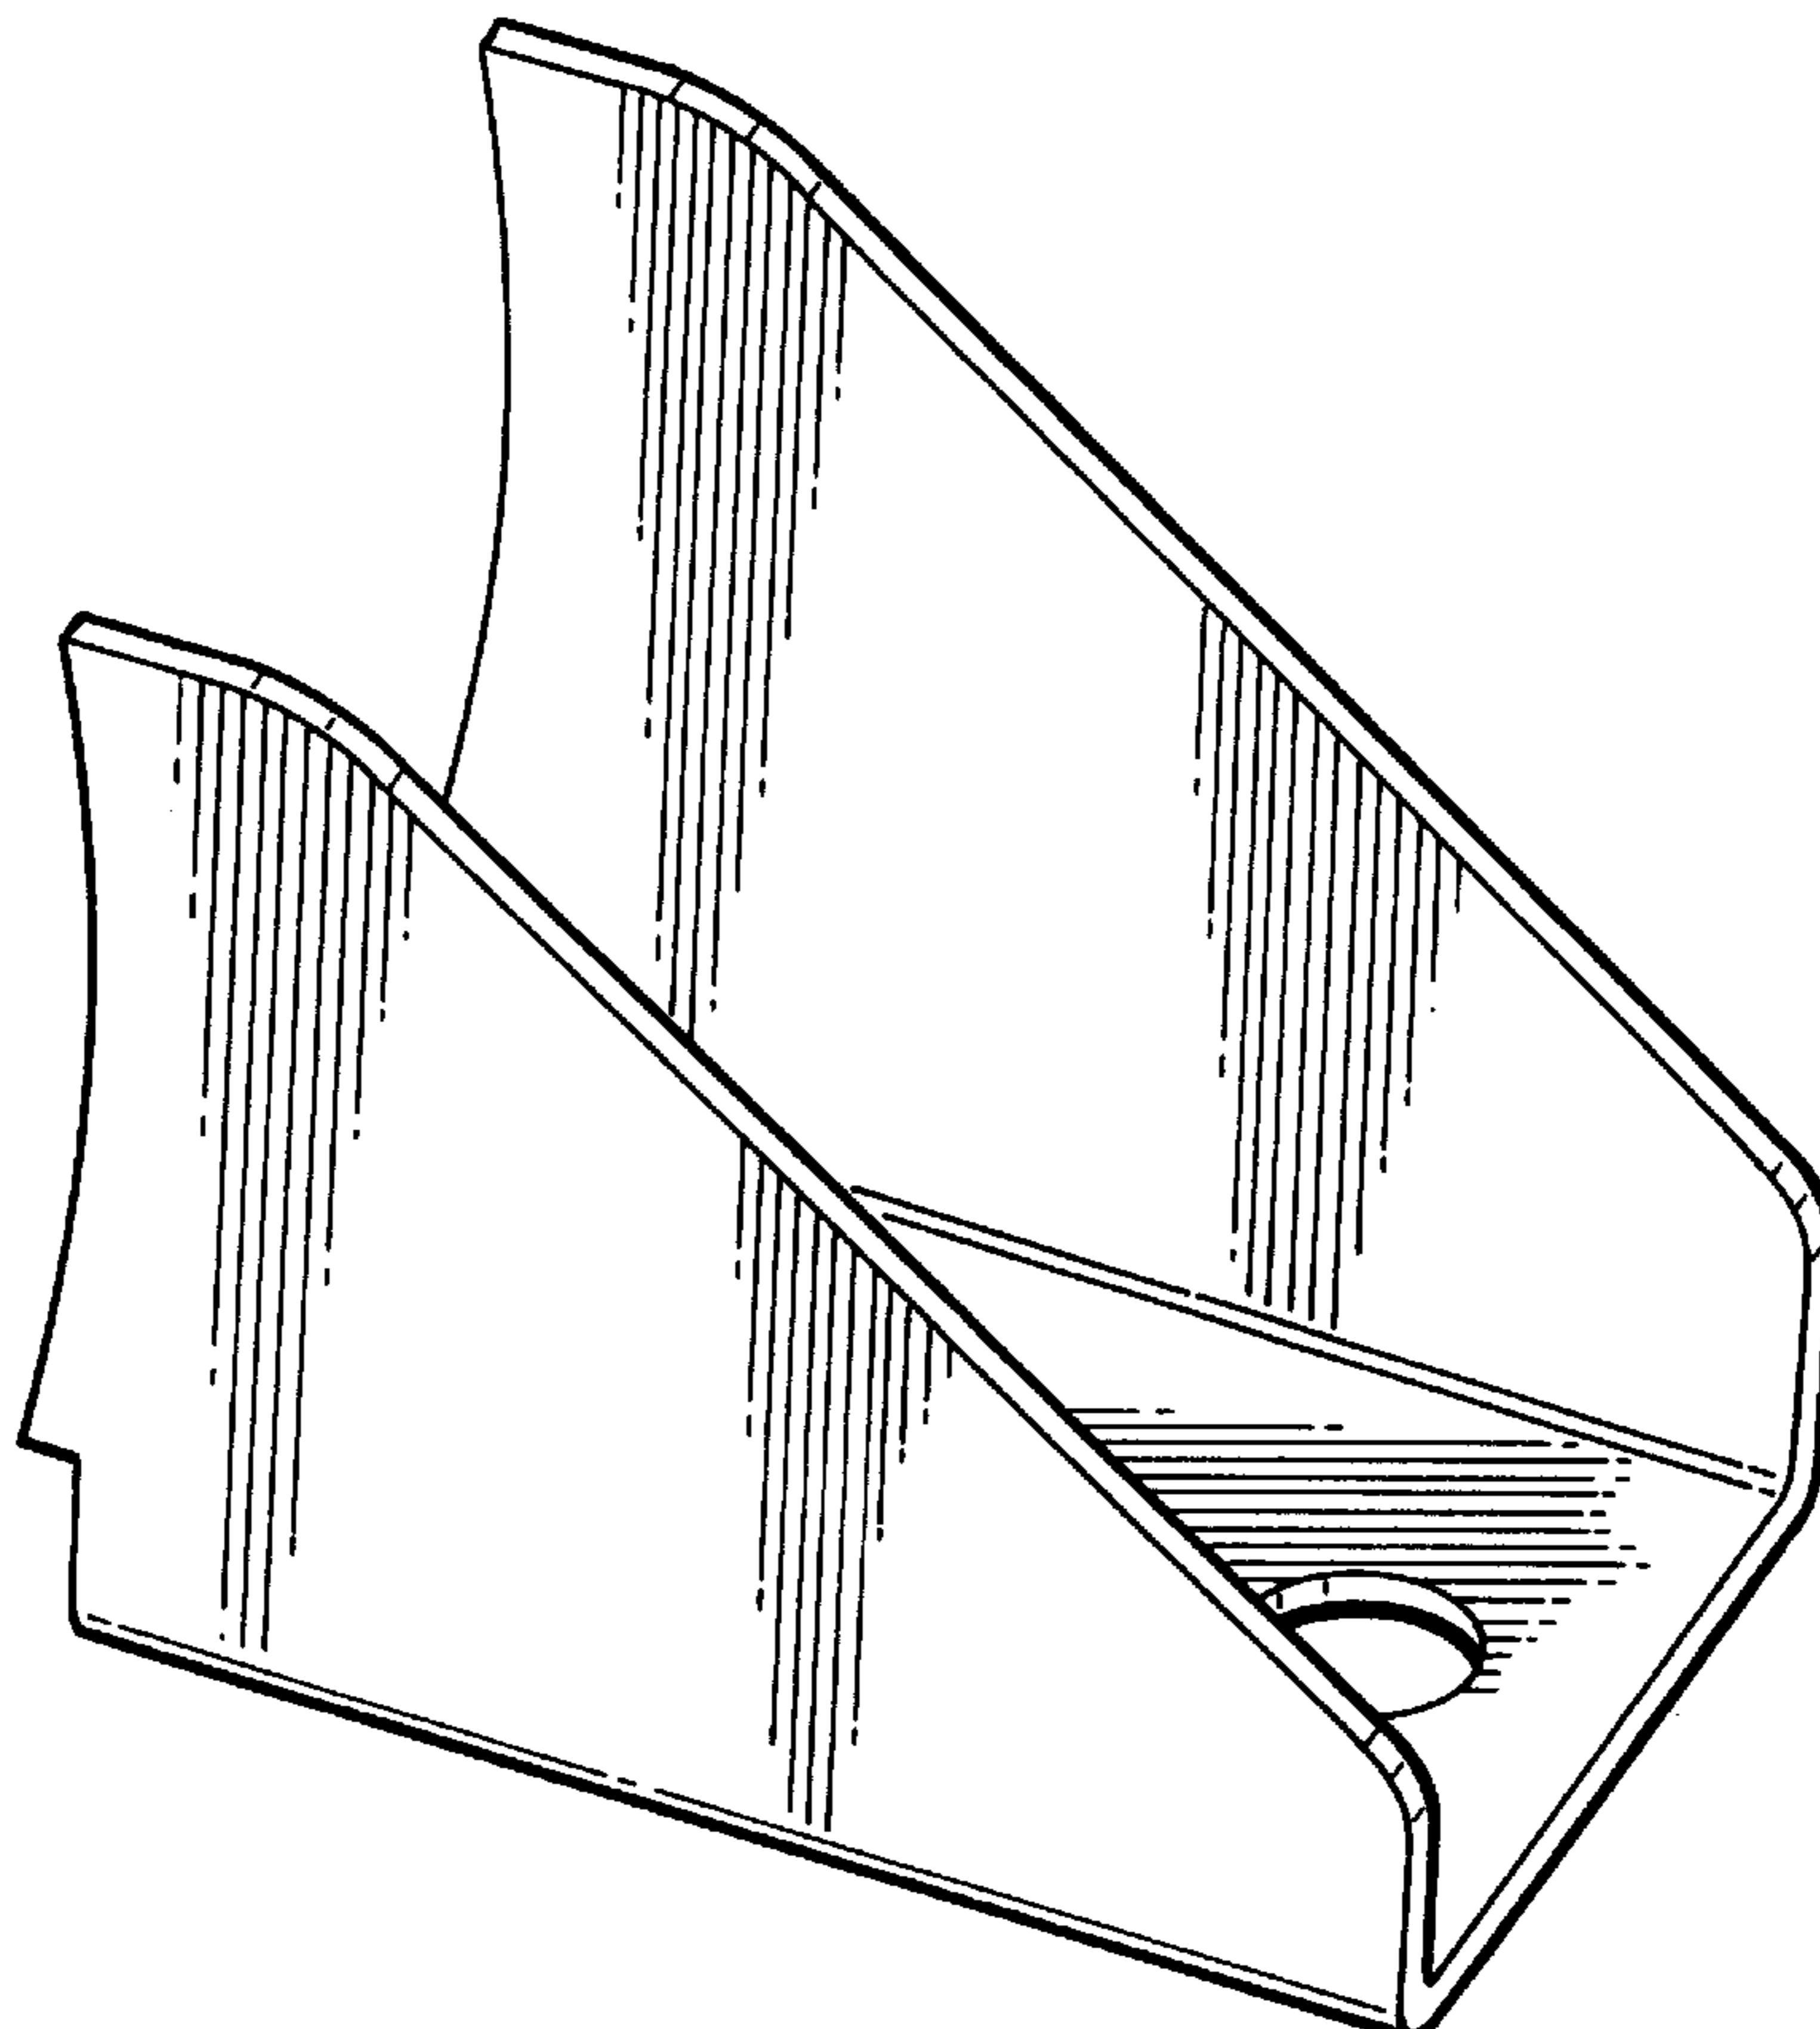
is a side perspective view of a variation of the railway car air brake reservoir mounting bracket shown in FIGS. 1 to 6;
